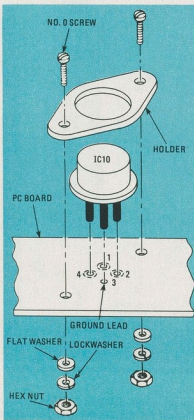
OSCILLATOR IC, IC10, can be mounted using hardware shown, or secured by soldering case to board.
